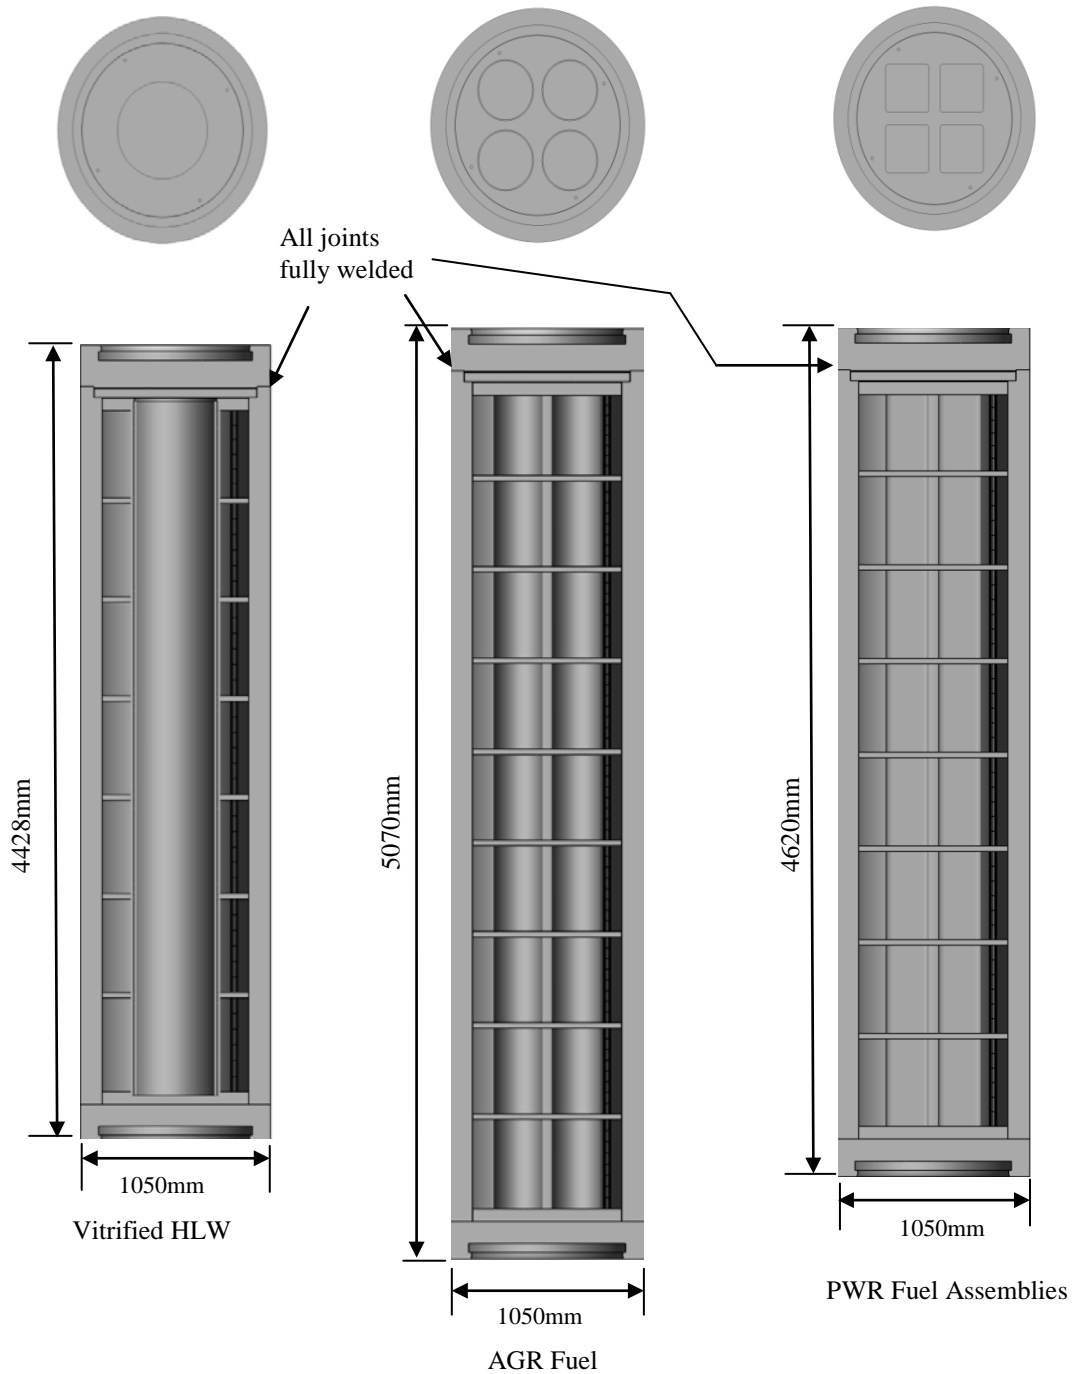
Disposal Canister Variant 2 – Steel with Open Frame Design
